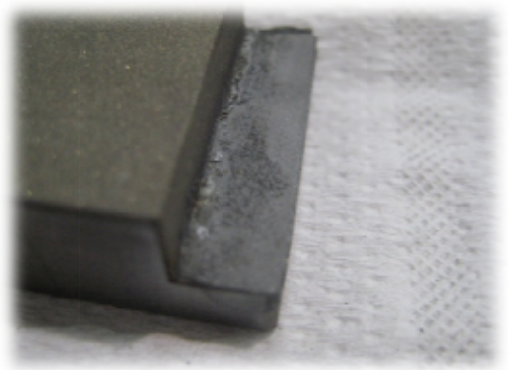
TAST SPECIMEN FRACTURE SURFACE
